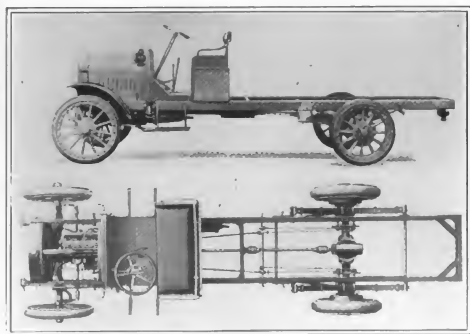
G. M. C. 2-tonner, side and top views, showing triple-jointed driveshaft, semi-flexible frame and radius rods
